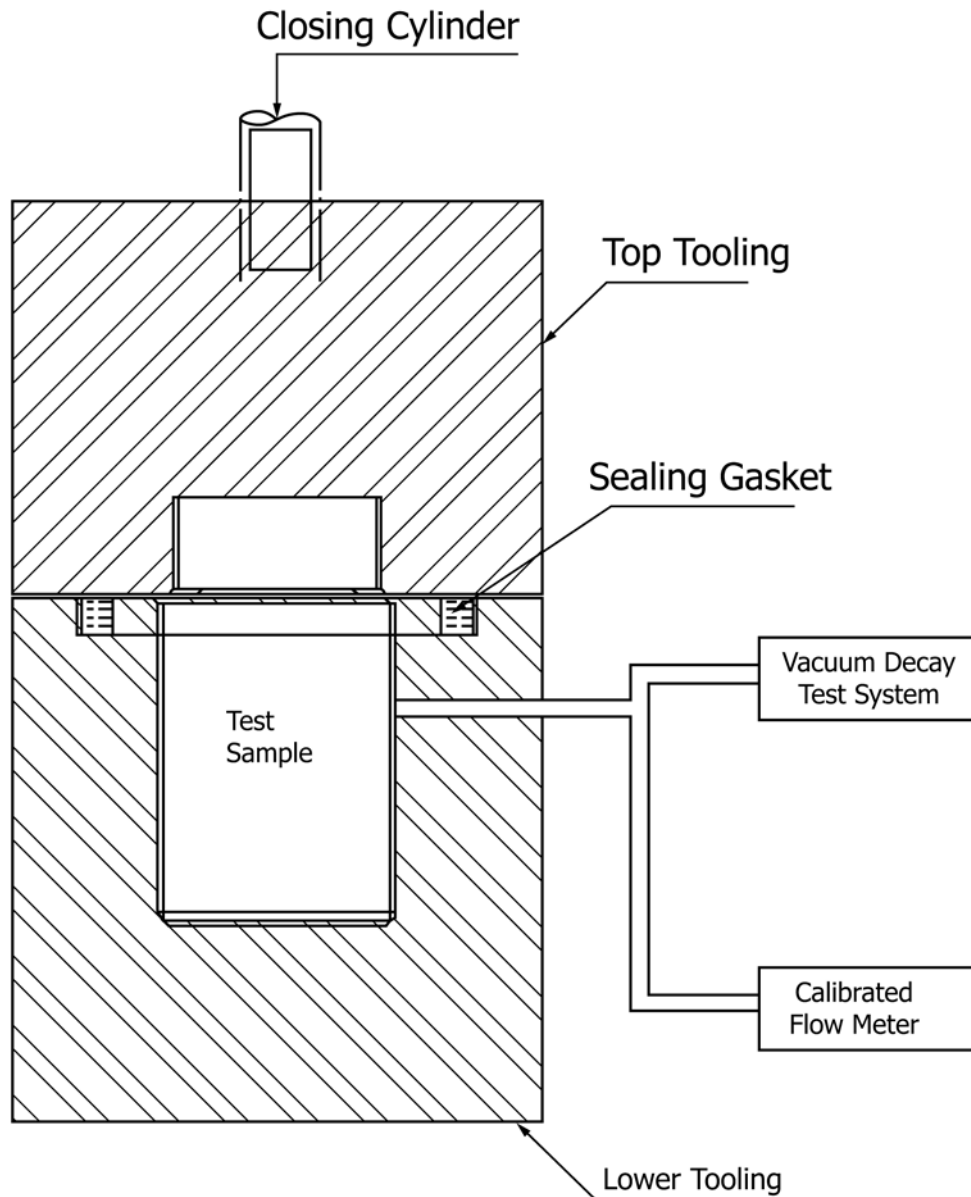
Schematic of Fixture and Rigid, Nonporous Test Package
